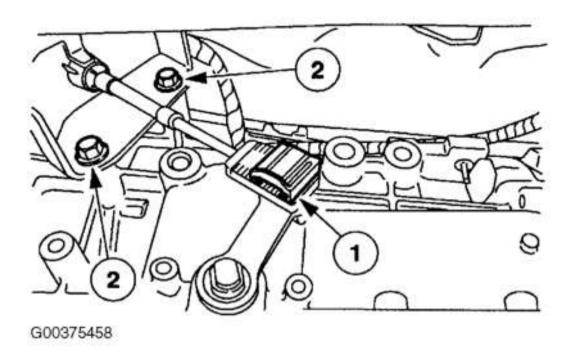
Removing Shift Cable Courtesy of FORD MOTOR CO.
